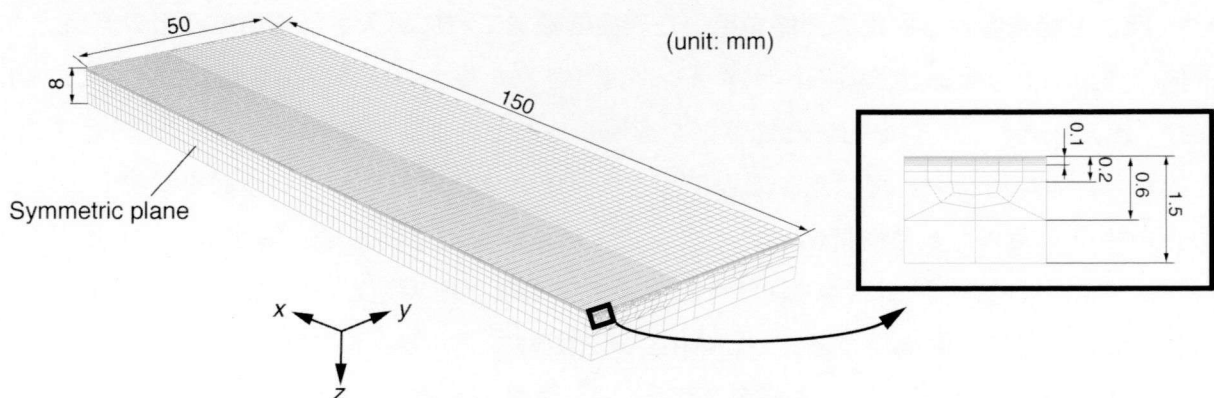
Analytical model for bead-on-plate welding.
